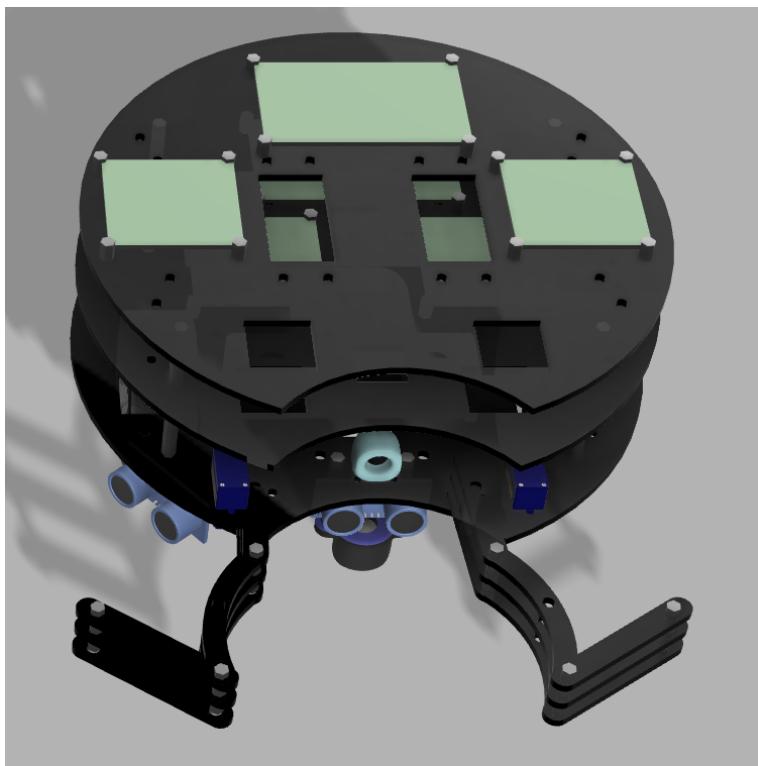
CAD: Beacon grabbing mode gripper positioning top angle view
